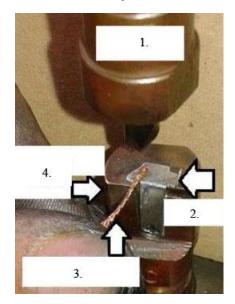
Welding the ground plate with the wire of the collector brush wire: 1 - upper electrode; 2 - ground plate; 3 - collector brush wire; 4 - lower electrode
